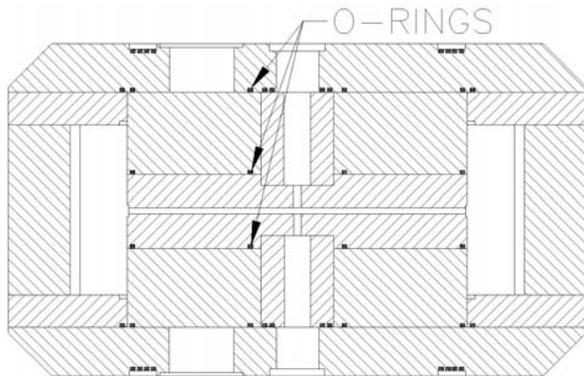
Cyclone30 magnet steel & o-ring arrangement. Fasteners/dowels are not shown. O-rings are not to scale.
